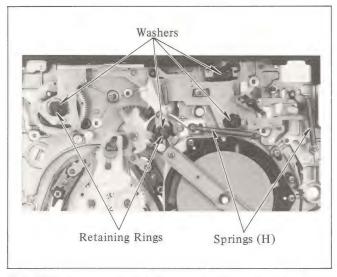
Assembly and Adjustment of Gears and Rods-(7)
